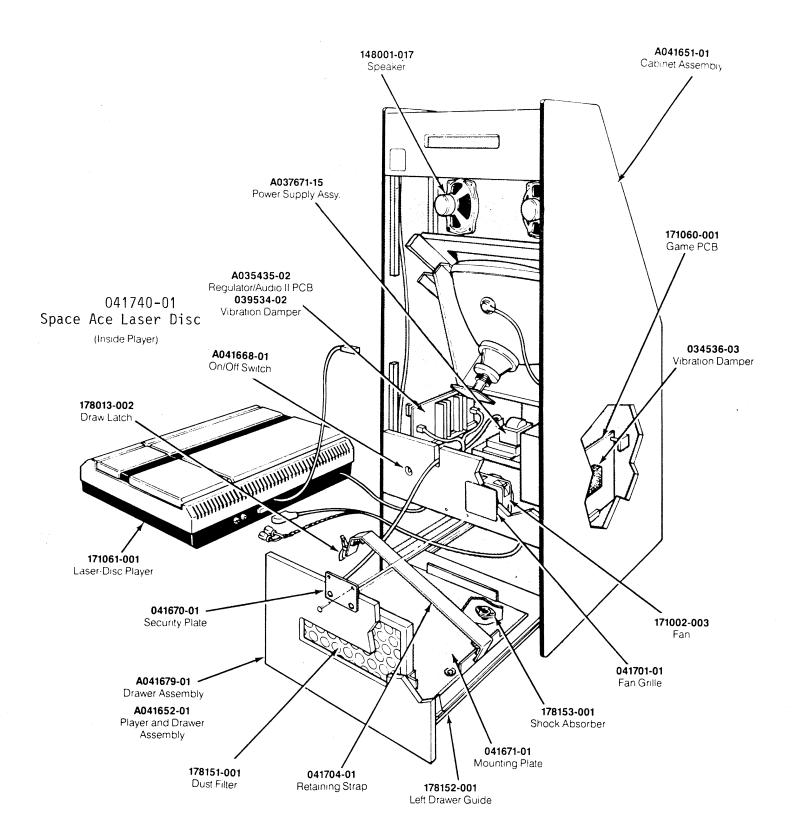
Cabinet-Mounted Assemblies, continued A041650-01 A
